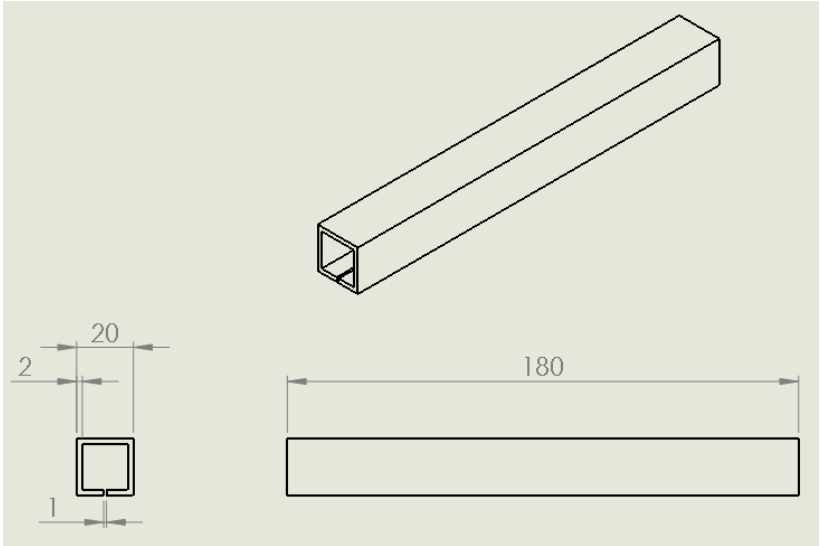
Dimensions of the hollow square beam cross-section with a slit (mm)
